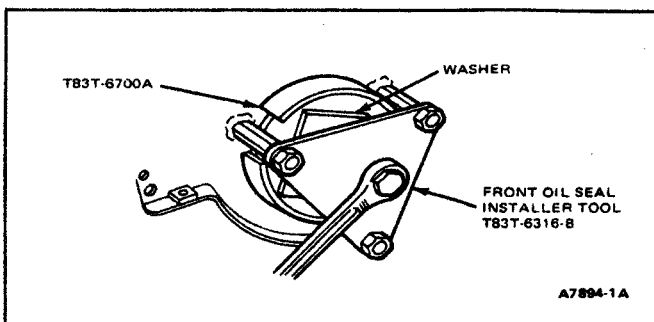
Front Crankshaft Seal Installation—In Vehicle
